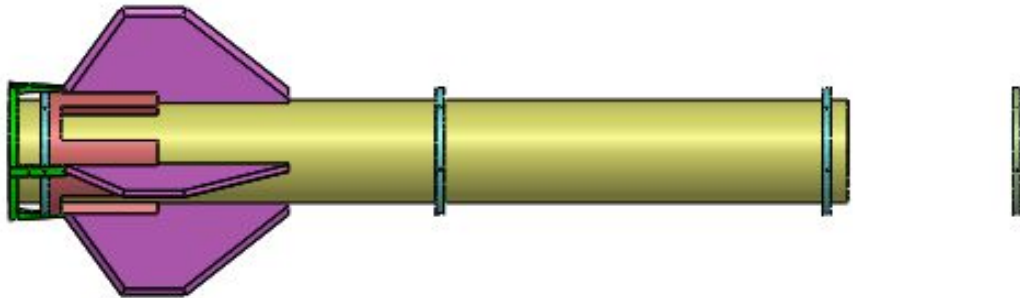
Lower Body Tube Assembly: Hidden Body Tube
